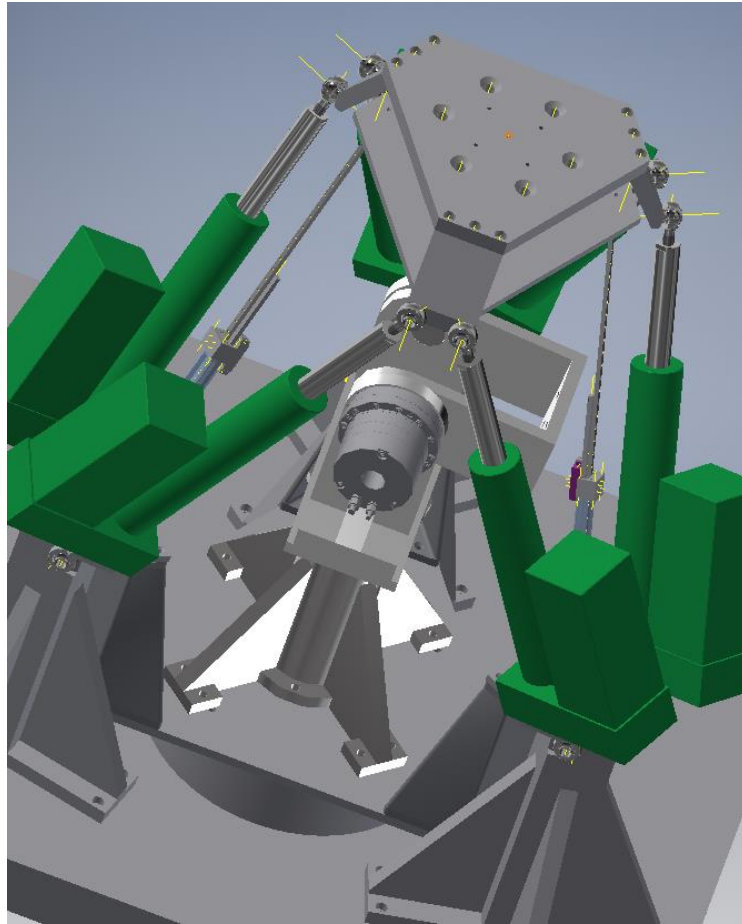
Birds eye view of the cradle, hexapod and SHA actuator assembly.
